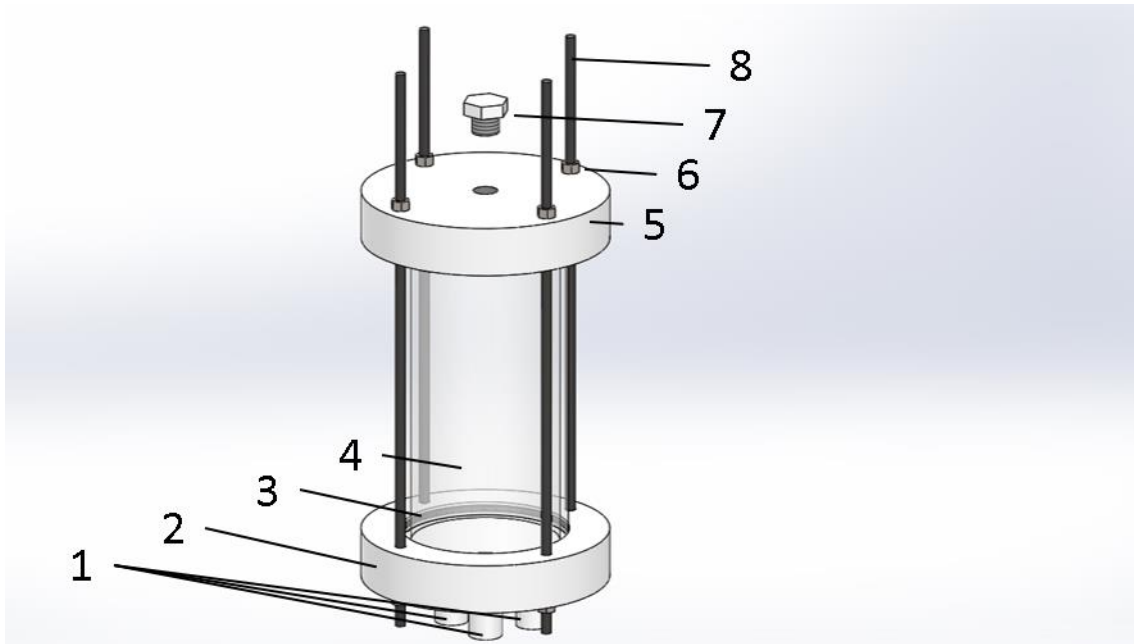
Schematic drawing of the electrolyte tank: (1) threaded screw-in for DN04/06 tubings, (2) PVC-U base part, (3) 3x50 FPM O-ring, (4) PMMA wall, (5) PVC-U lid part, (6) M6 nut, (7) PP locking screw, and (8) threaded M6 rod.
